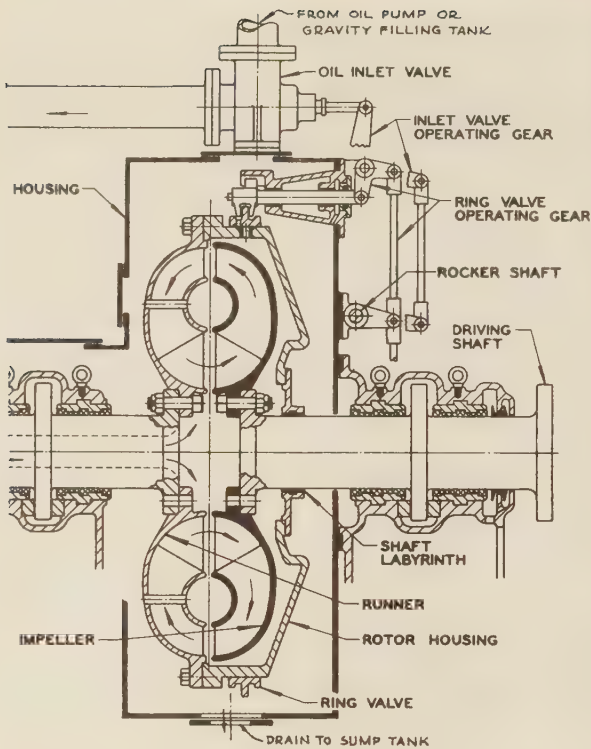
HYDRAULIC COUPLING WITH RING-TYPE QUICK-EMPTYING VALVE
